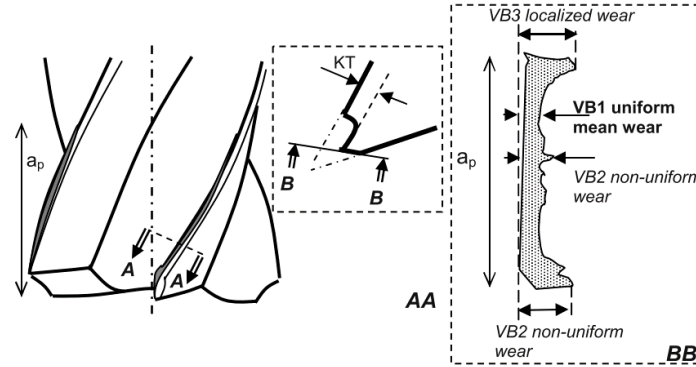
Wear of end-milling tools, BS ISO 8688 [154]
